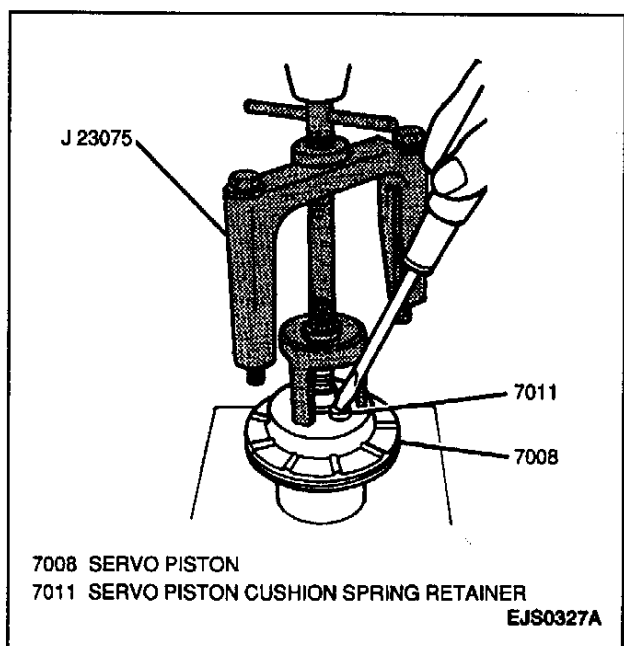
Removing Servo Piston Cushion Retainer Spring (3L30, 3-Speed)
